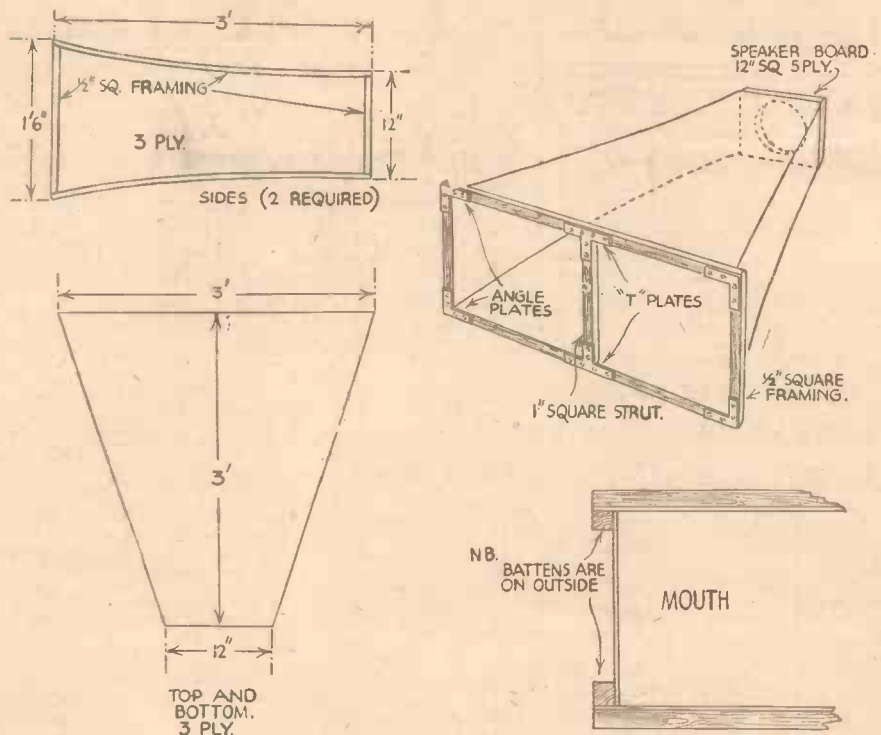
Details of construction of loud-speaker horns for open air work.
